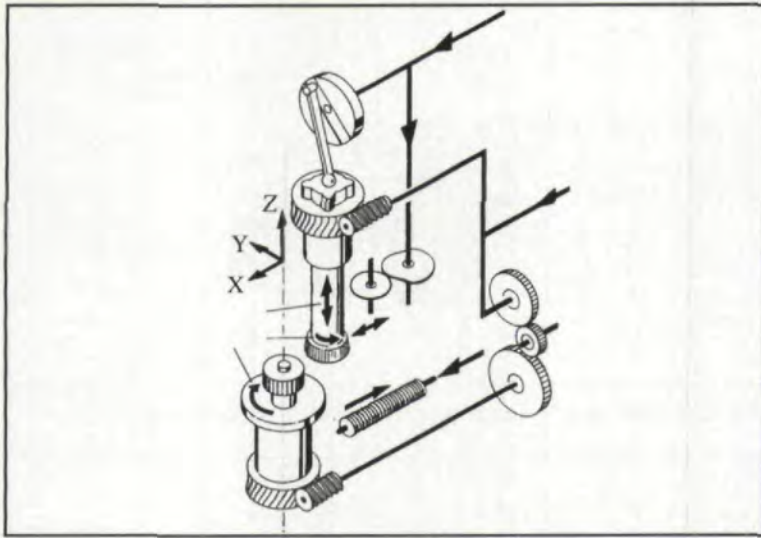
Mechanical link between cutter and work on a mechanical gear shaper.
